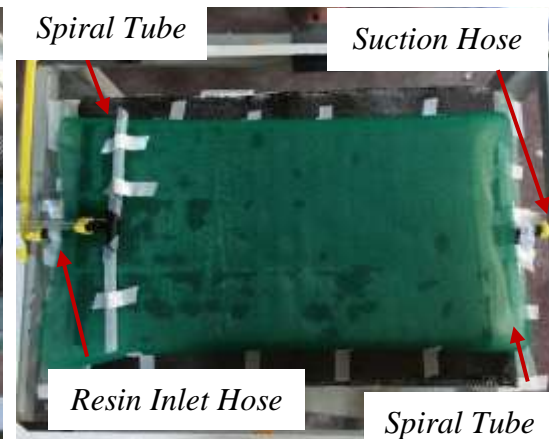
Positioning of resin inlet, air suction hoses and spiral tubes over the part
